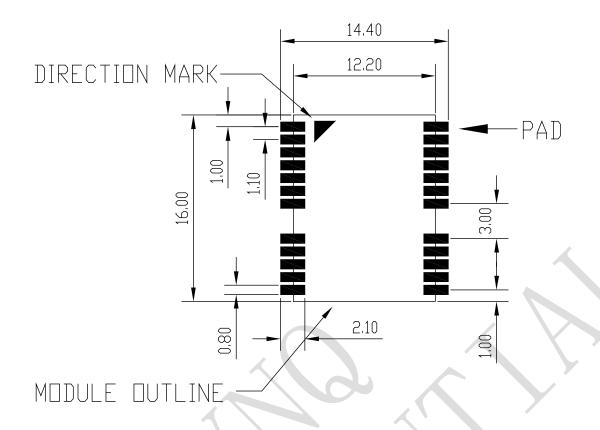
Recommended PCB decal (top view) (Unit: mm)
